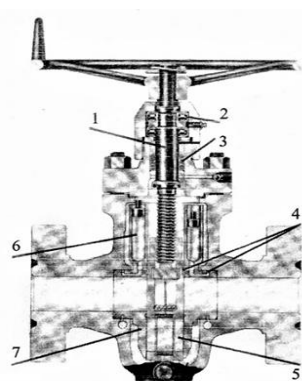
Gate valve model "C" with automatic supply of sealing grease from "McEvoy": 1 - spindle; 2 - thrust bearings; 3 - spindle seal; 4 - system of channels for supplying lubricant; 5 - gate; 6 - reservoir for lubrication; 7 - cheek-saddle.
